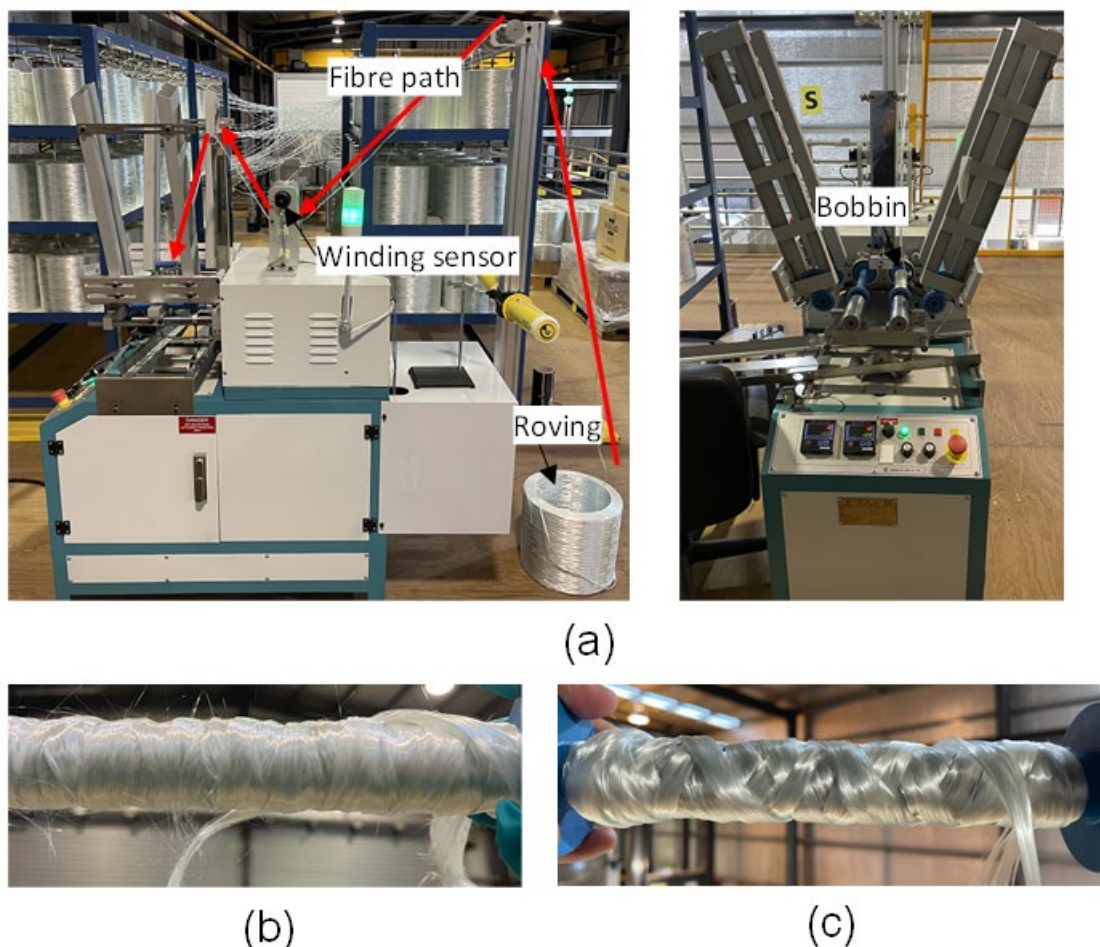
(a) Rewinding equipment, (b) rewinding result for glass fibres with yarn damage and (c) accepted bobbin with glass fibres
